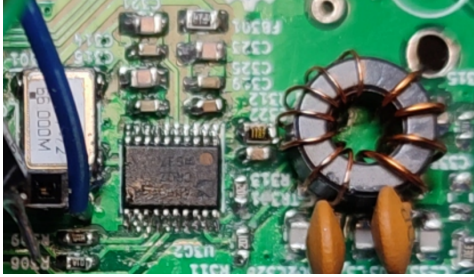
AD9834 with matching transformer and LPF on the PCB
